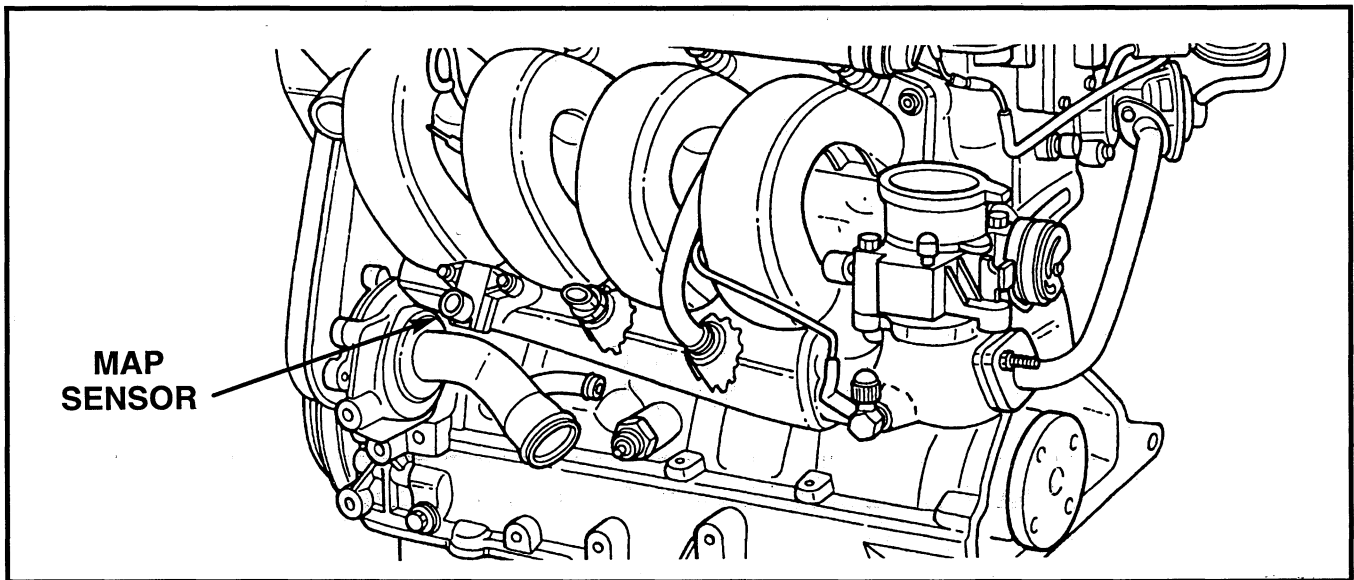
Manifold Absolute Pressure (MAP) Sensor
